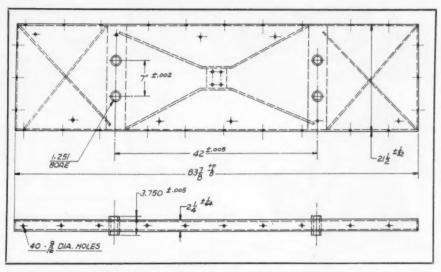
Drawing showing details of weldment as finally designed. Top and sides are a single sheet to which ends and braces are welded before the four machined bushings are finally welded to the top sheet and transverse plates.
